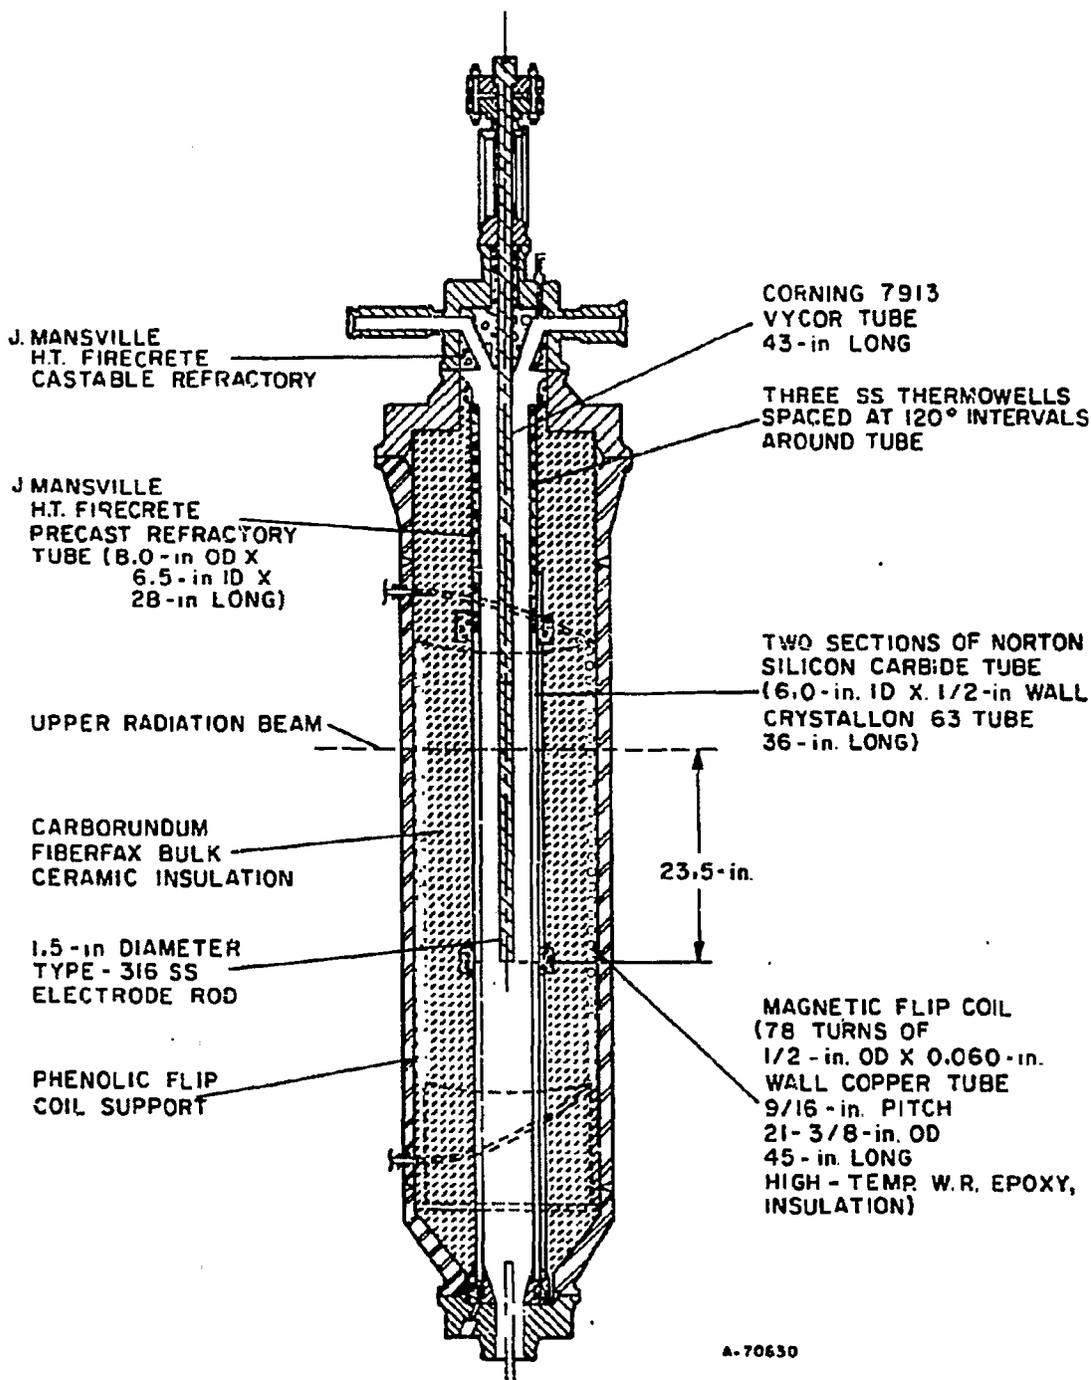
CUTAWAY VIEW OF REACTOR VESSEL IN A CONCENTRIC CONFIGURATION FOR RUN EG-56
